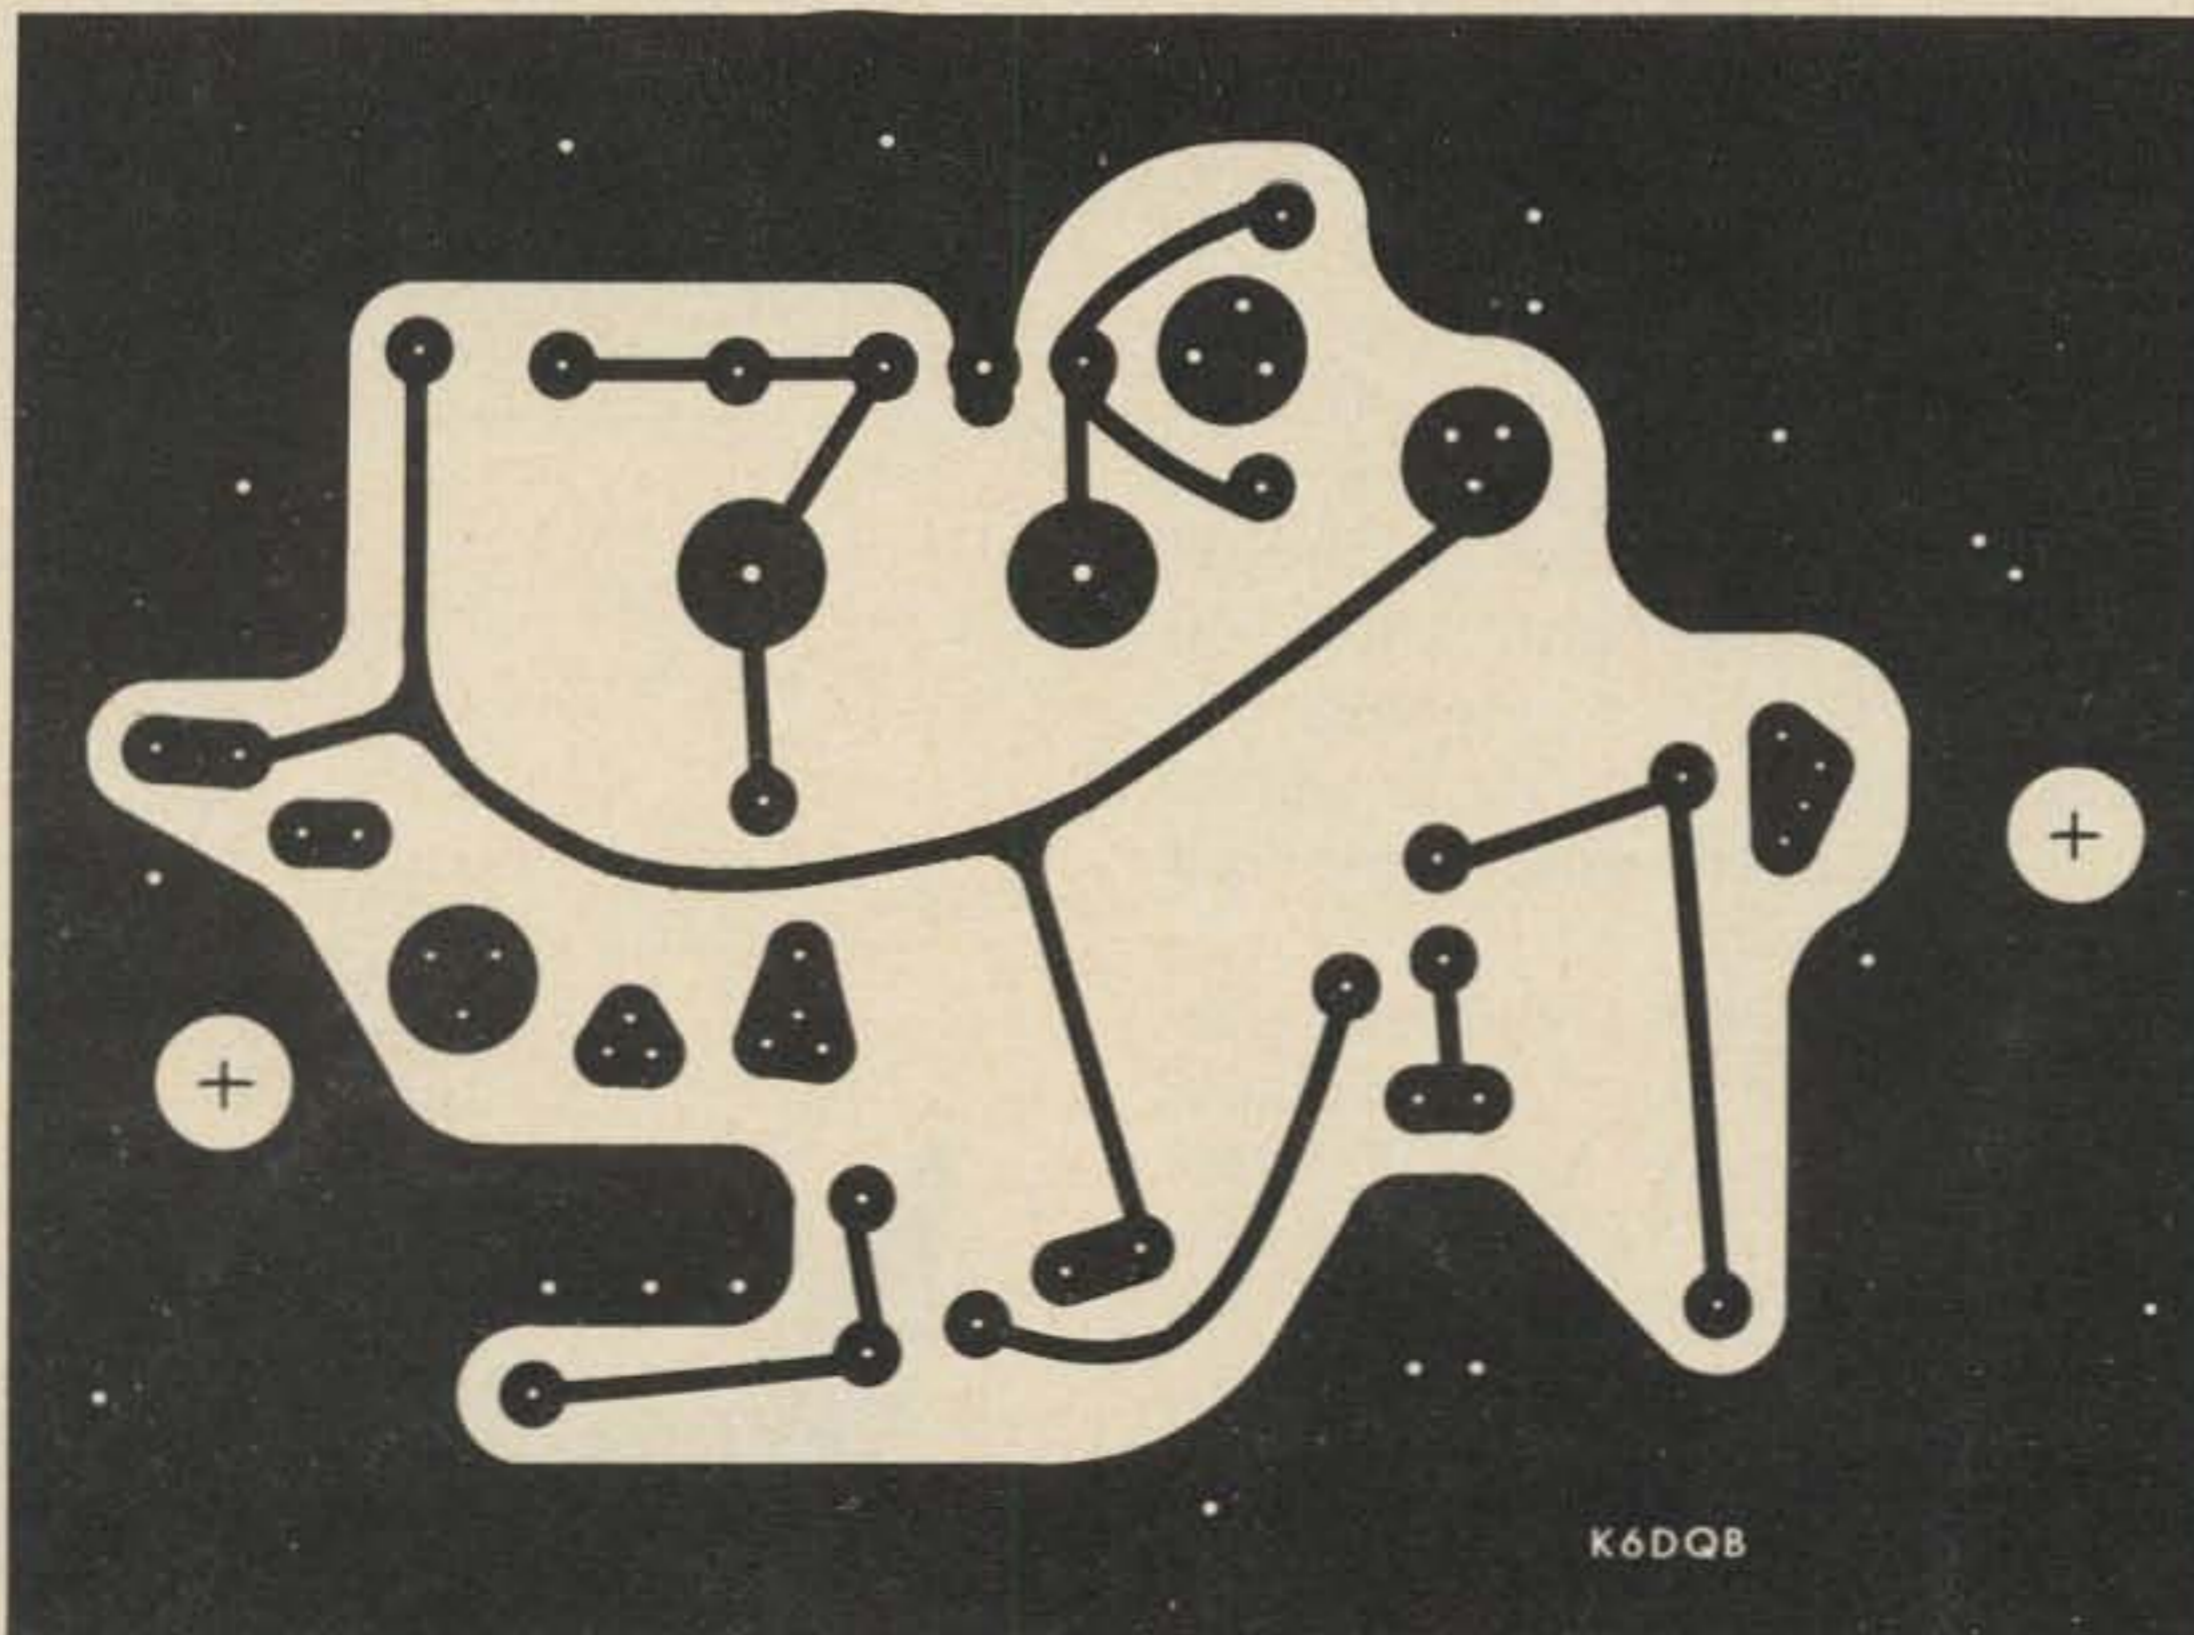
Copper foil side of the printed circuit board for the Novice converter.
